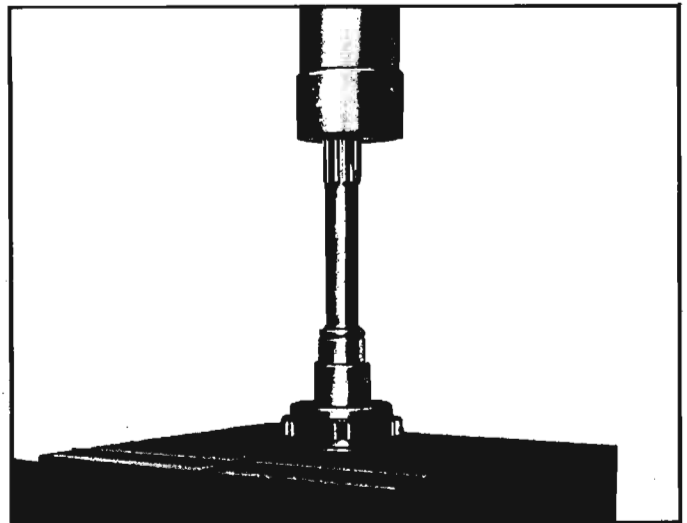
D-39—Removing 1-2 Synchronizer and First Gear Sleeve from Mainshaft
